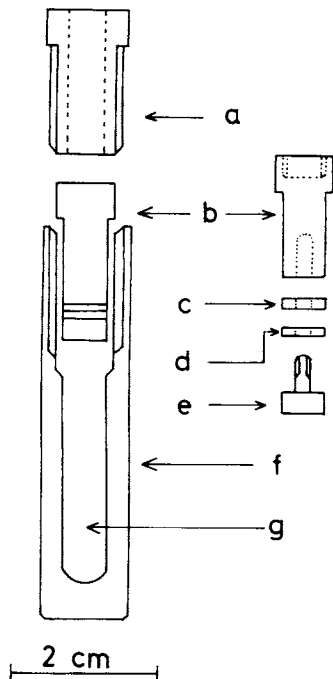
Cross-sectional view of the pressure clamp cell. a:locking nut, b:piston, c:Cu seal, d:teflon seal, e:mushroom plug, f:cylinder, g:sample room.
